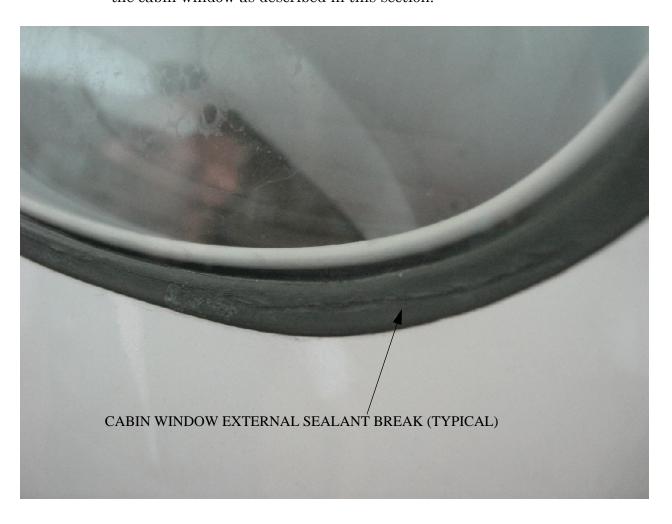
Cabin Window External Sealant - Check (Sheet 1 of 2)
